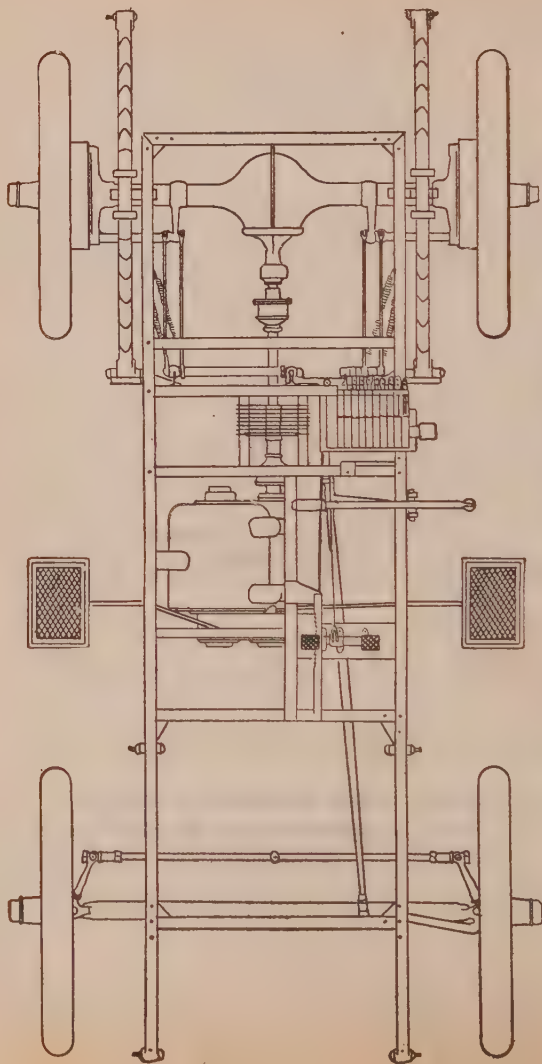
Chassis of Baker electric, showing shaft drive. The first speed reduction is by a short Reynolds silent chain in dust proof casing; power is transmitted to the wheels through the usual bevel gear at the rear axle.
